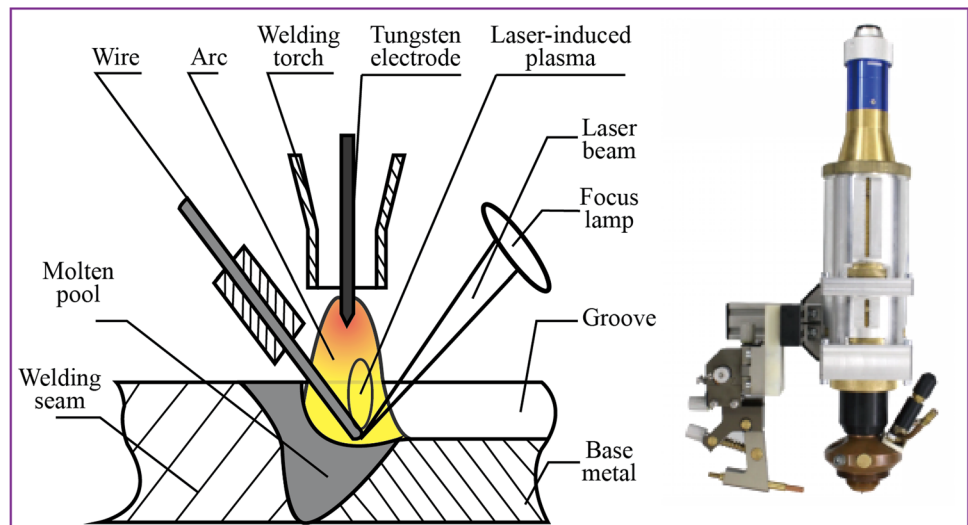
Narrow gap weld seam formation by combining positive defocusing laser with TIG arc [88]
